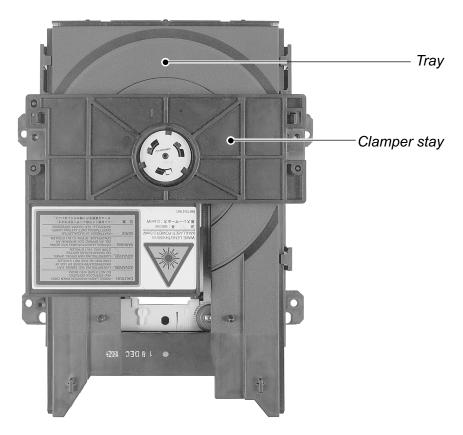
Mechanism chassis assembly (Top side)
